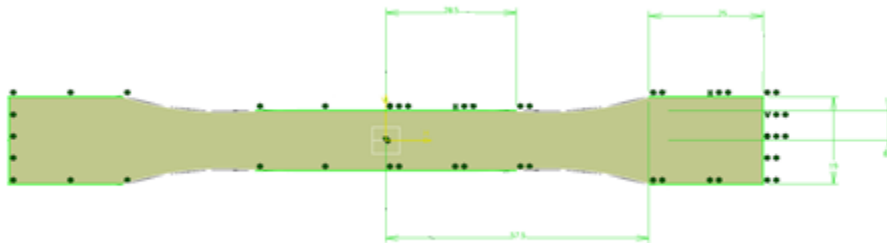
Specimen II Standard Dimension of D638-14 Over 7 mm to 14mm
